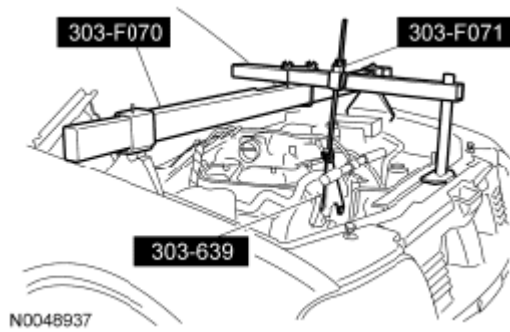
Installing Engine Support Bar, Support Hook And Engine Support Bracket
